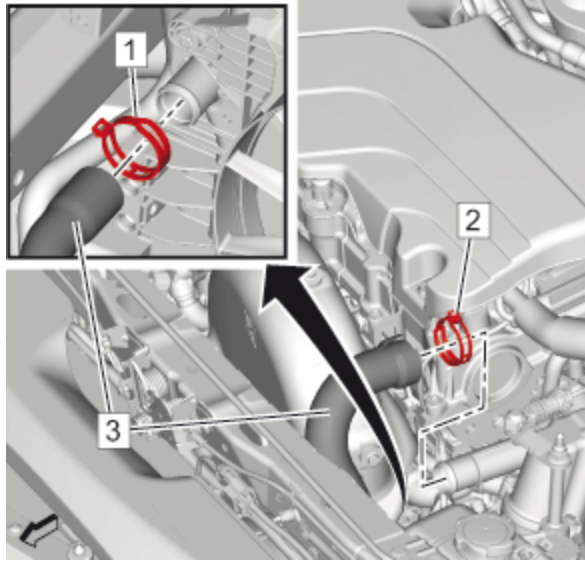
Radiator Inlet Hose Clamp And Radiator Inlet Hose
